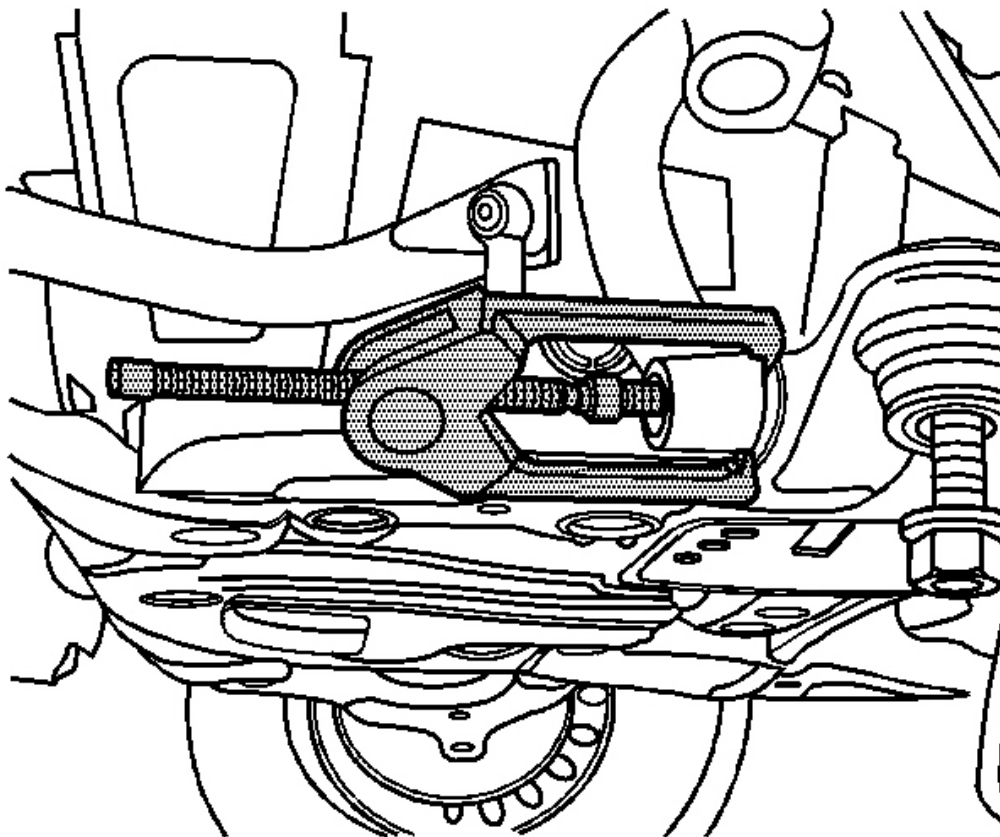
View Of Shock Module Yoke To Lower Control Arm Retaining Nut
